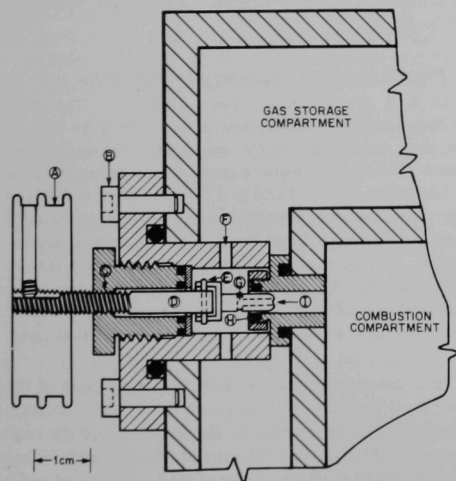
Improved Interconnecting Valve for Two-compartment Calorimetric Bomb. A, pulley; B, bolt; C, double-lead threads; D, stem; E, flexible joint; F, gas passage through valve housing; G, transverse hole; H, O-ring; I, longitudinal hole.
